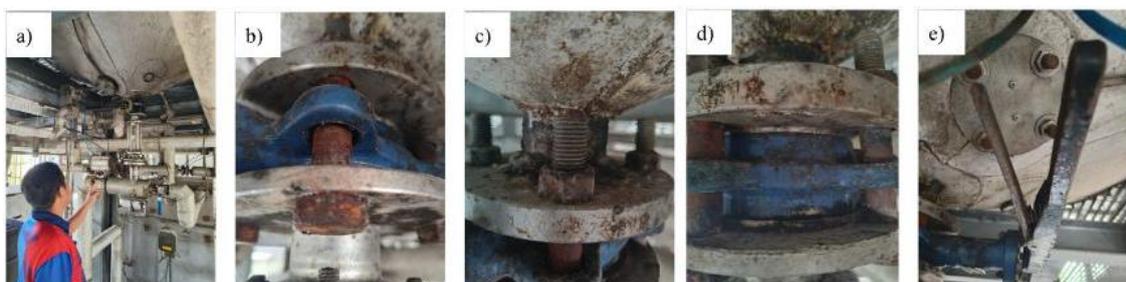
Outer visual inspection of (a) full outer body (b) bolt (c) nut (d) body (e) handle
